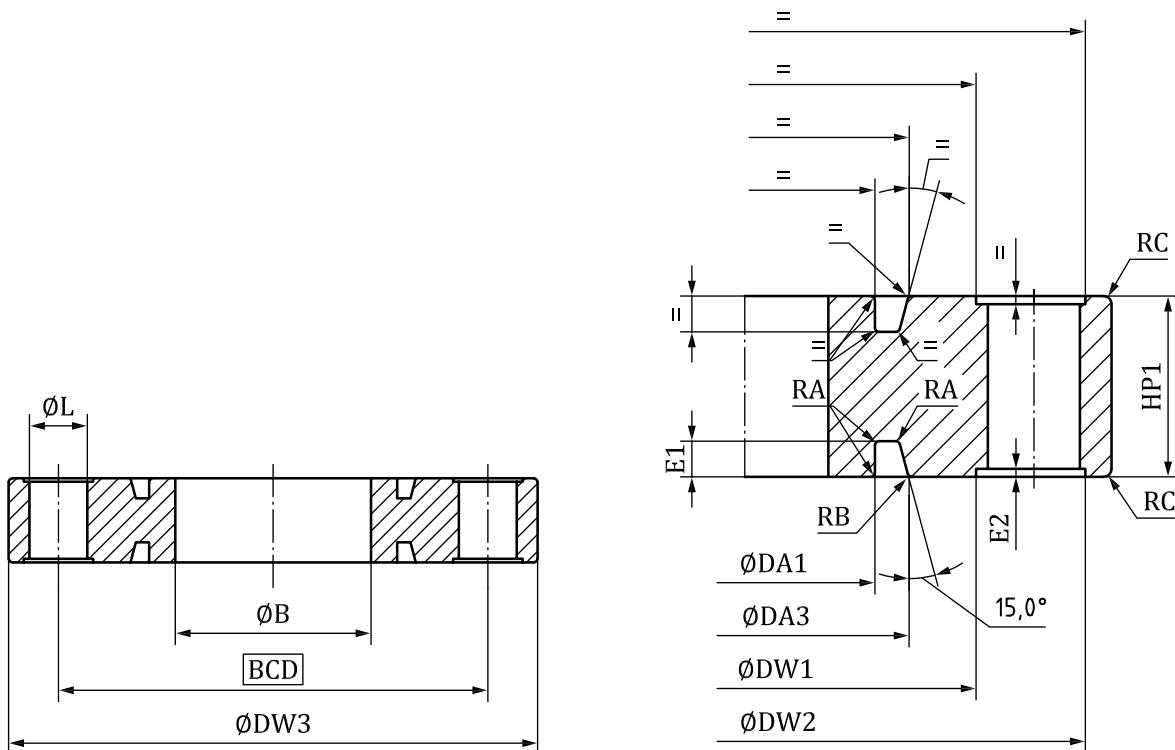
Nomenclatures for paddle spacer (PS) flange
